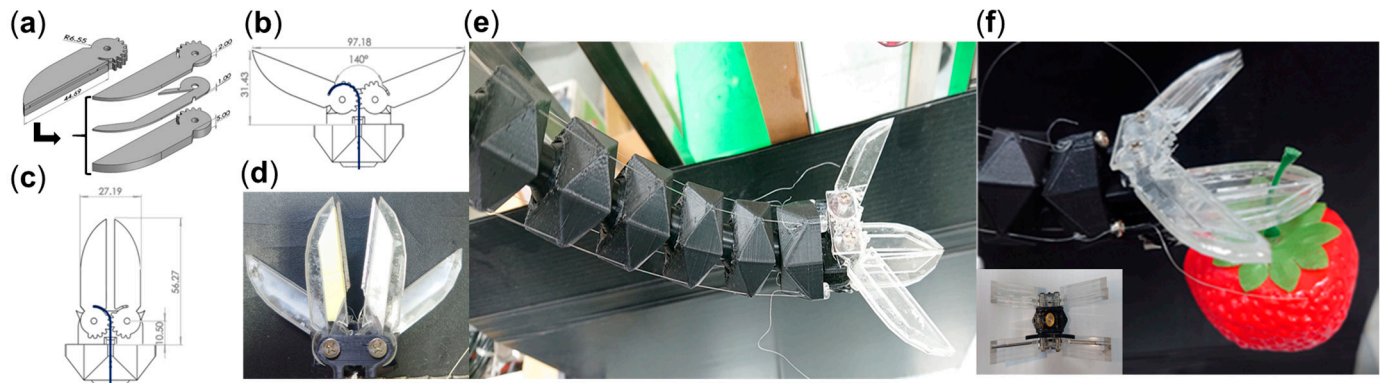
Design of clamp and cutting tool. (a) The structure of clamping and cutting tools; (b) clamp in the open state; (c) clamp in the closed state; (d) prototype of the two sets of clamps; (e) mounting of the clamp on the joint arm (with the upper clamp in the open state and the lower clamp in the closed state); (f) the clamp in action for picking strawberries (the nozzle is installed inside the tube, bottom left).
